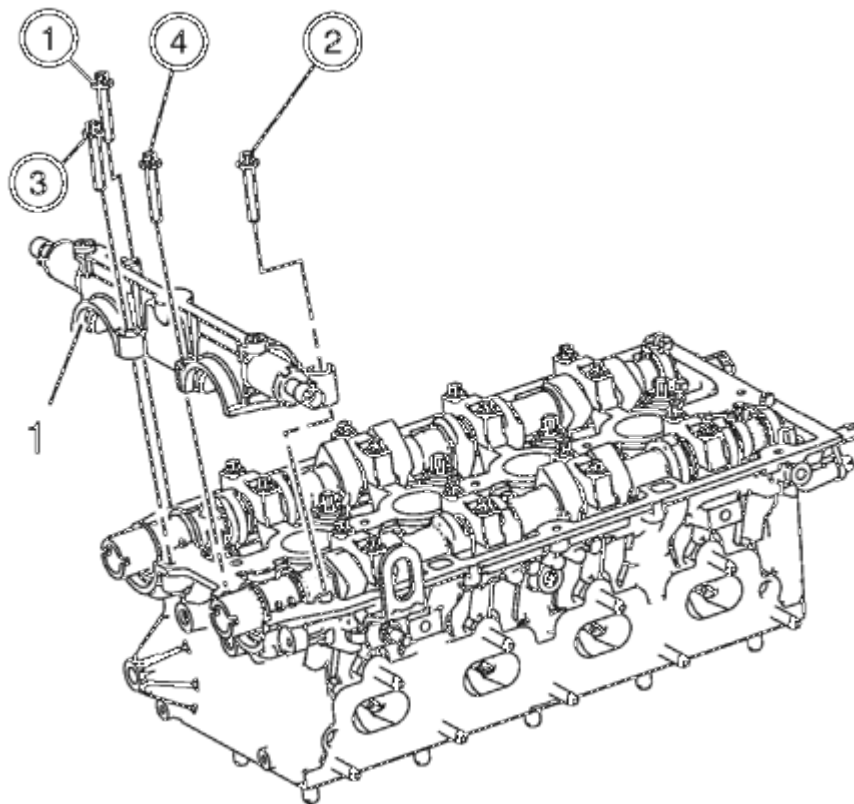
Camshaft Bearing Cap And Camshaft Bearing Cap Bolts Removal Sequence
